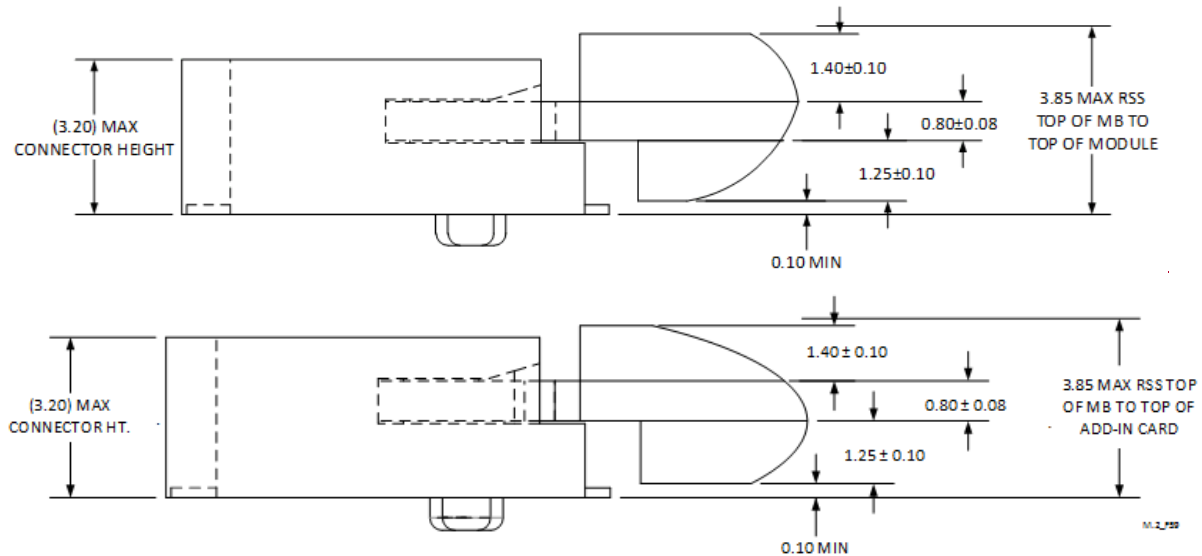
H3.2-D3 - Stack-up Top Mount Double-sided Add-in Card for 1.5 Maximum Top-side Component Height
